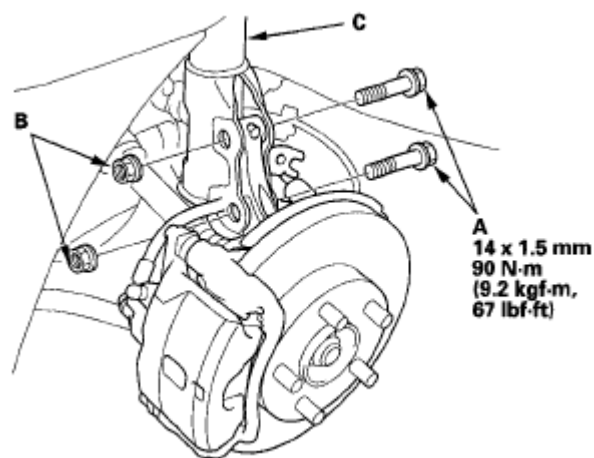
Identifying Damper Pinch Bolts (With Torque Specifications)
